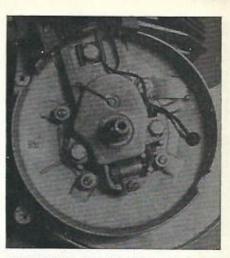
View of model 275, 276, 380, 385, 1680 and 1685 magneto showing timing mark. Punch mark near center of slot for lower left retaining cap screw should be aligned with raised line on backing plate. Models 177, 187, 350, 360, 1660 and 1661 are similar.
